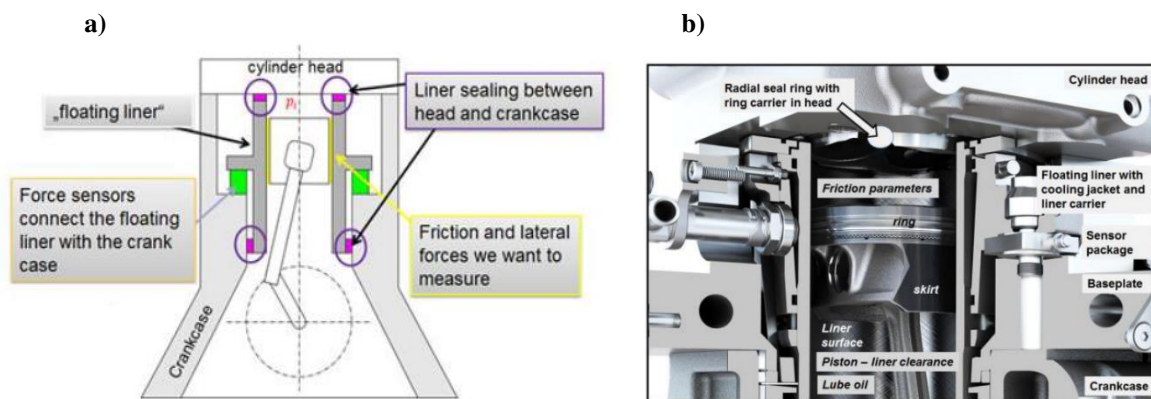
a) Simplified scheme of the floating liner measurement system, b) piston-cylinder liner interface cross-section and detailed component layout of the "FRISC" floating liner single-cylinder engine [15], [16].
